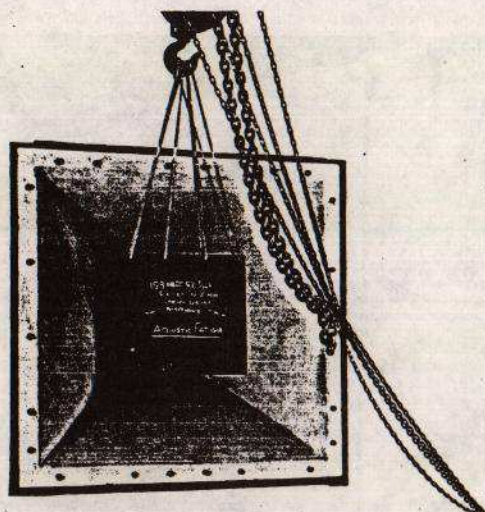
ACOUSTIC FATIGUE TEST OF FILLET WELDS IN HORN MOUTH
